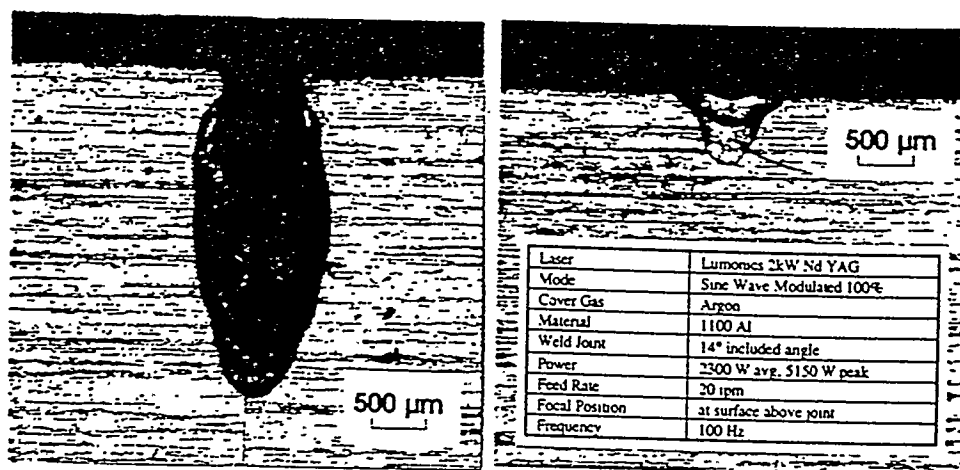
Comparison Between a Narrow Gap Laser Weld and a Bead on Plate Weld
